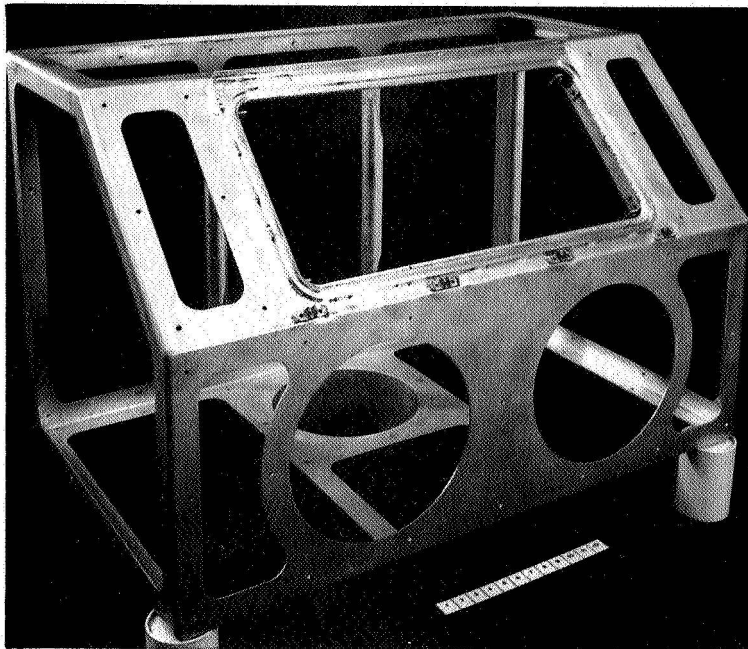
Welded Sheet Metal Frame and Partially Assembled Glove Box
